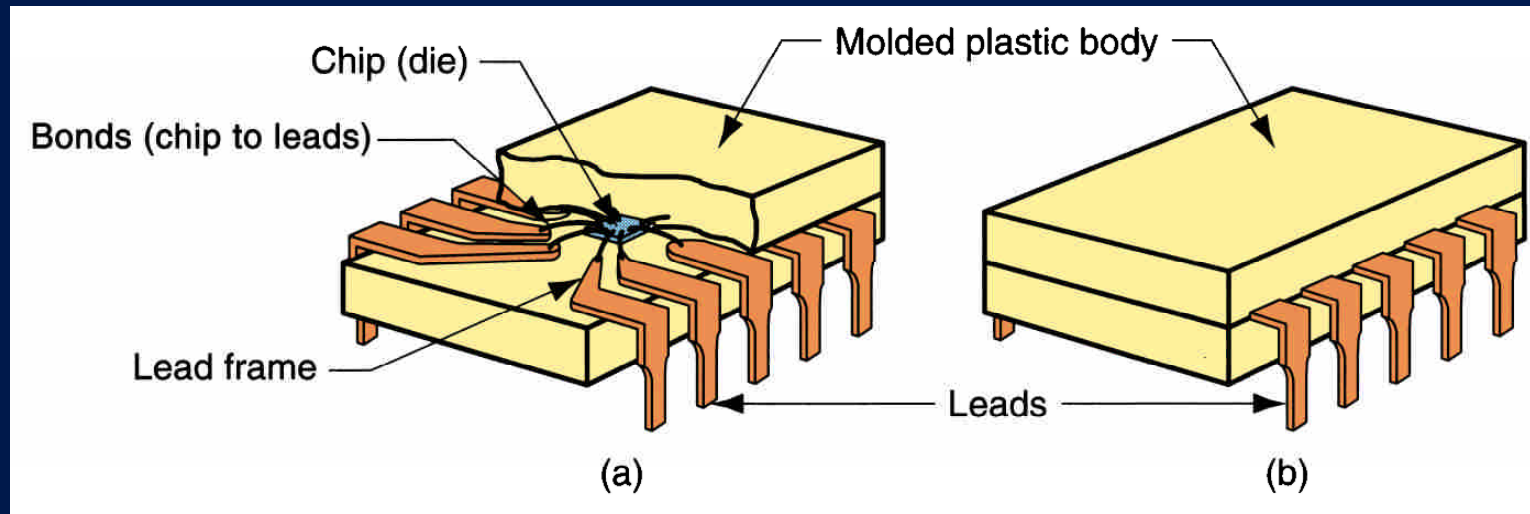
Packaging of an integrated circuit chip: (a) cutaway view showing the chip attached to a lead frame and encapsulated in a plastic enclosure, and (b) the package as it would appear to a user. This type of package is called a dual in-line package (DIP).
